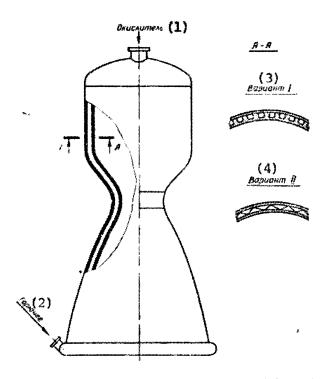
Design of Soldered-Welded Chamber (the Mixing Head of the Chamber Is Shown Above in Cross-Section)
